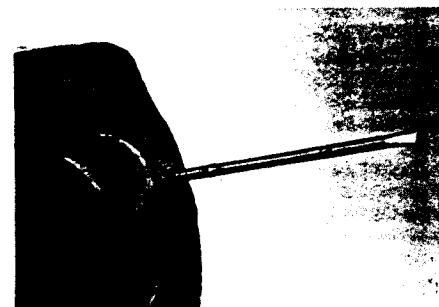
Make your reaming tool by filing one end of pushrod wire to a blade.
